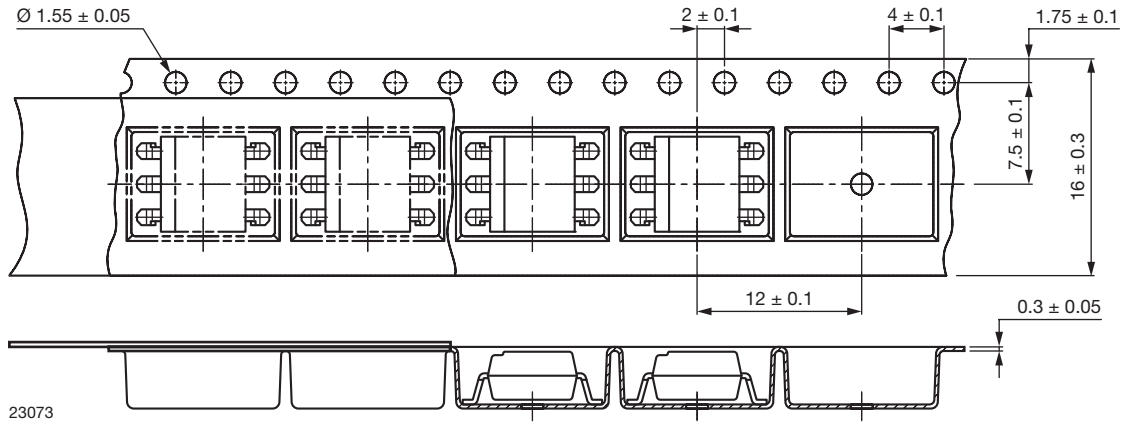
Tape and Reel Packaging (1000 pieces on reel)
